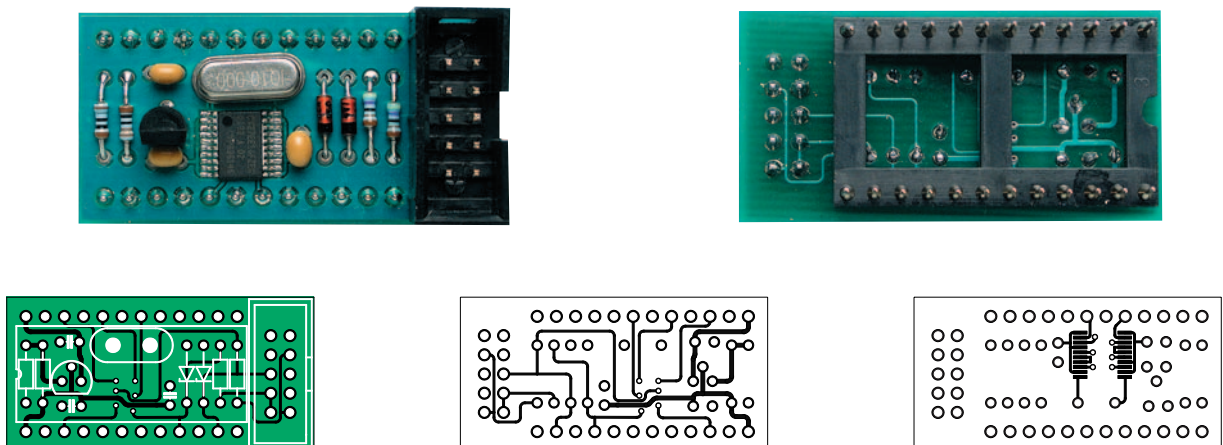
The PCB is arranged as a 24 pin DIP outline.
